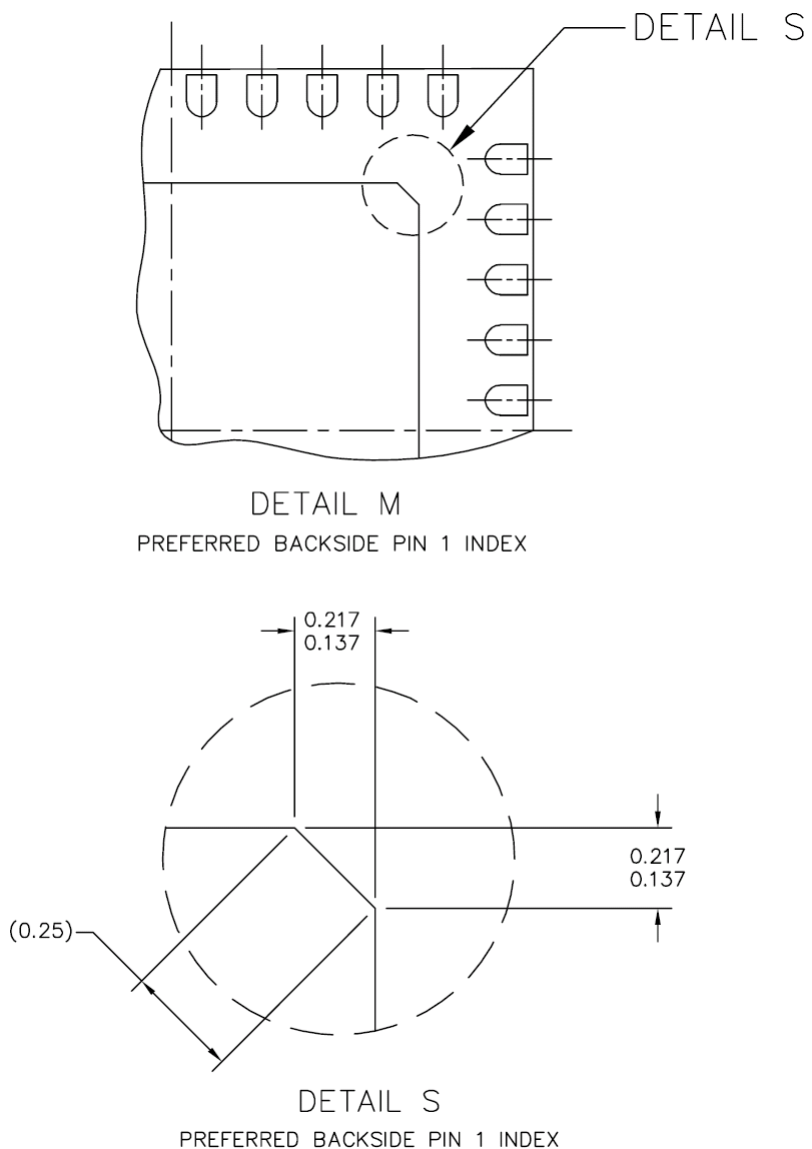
Outline Dimensions for QFN40, 6x6 mm - Continued
